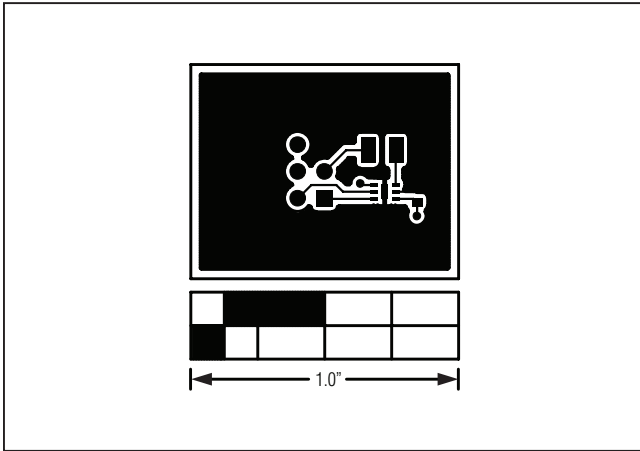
MAX44000 Daughter Board PCB Layout—Top
